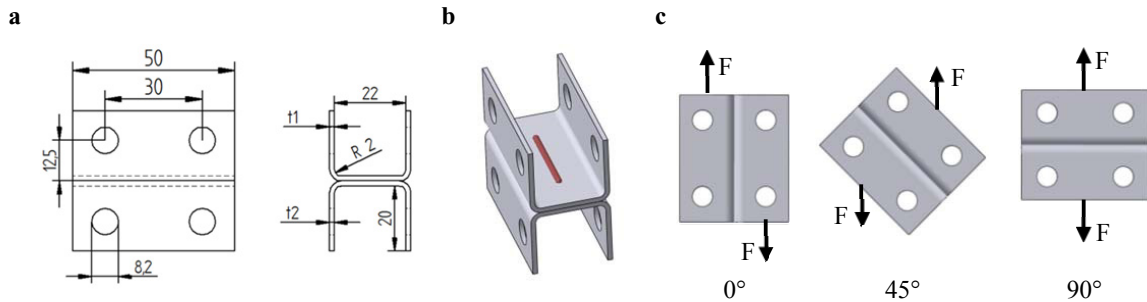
(a) geometry of KS-2-specimen; (b) KS-2-specimen with laser seam of 25 mm; (c) load directions.
